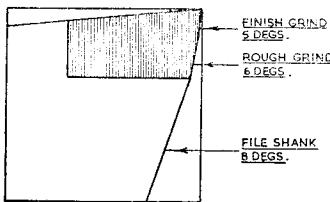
Showing the three facets forming the side clearance given to a knife tool
